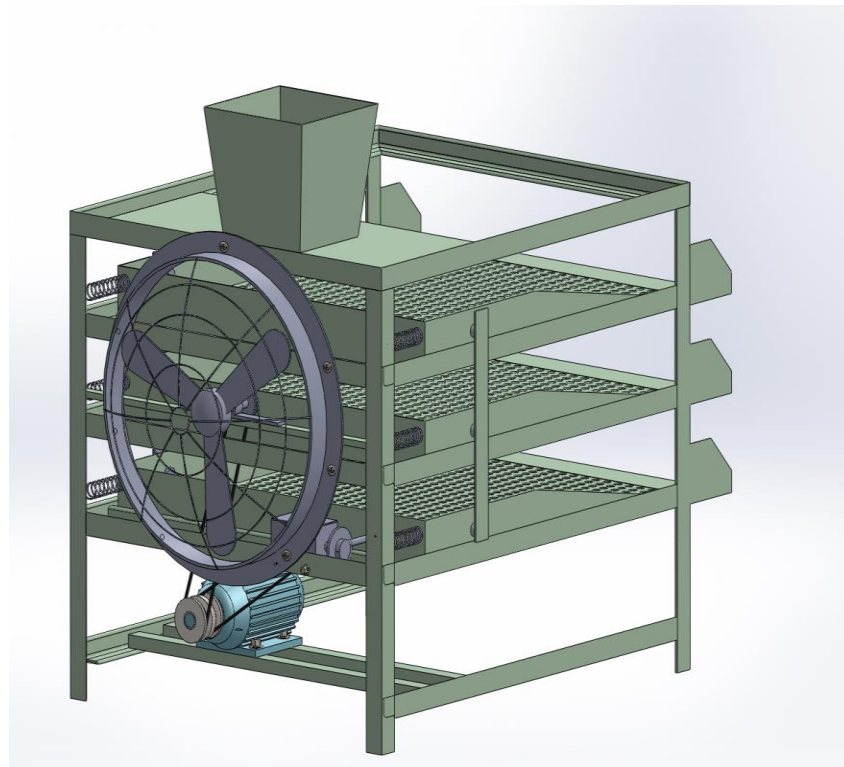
The Tiger Nut Cleaning and Sorting Machine
